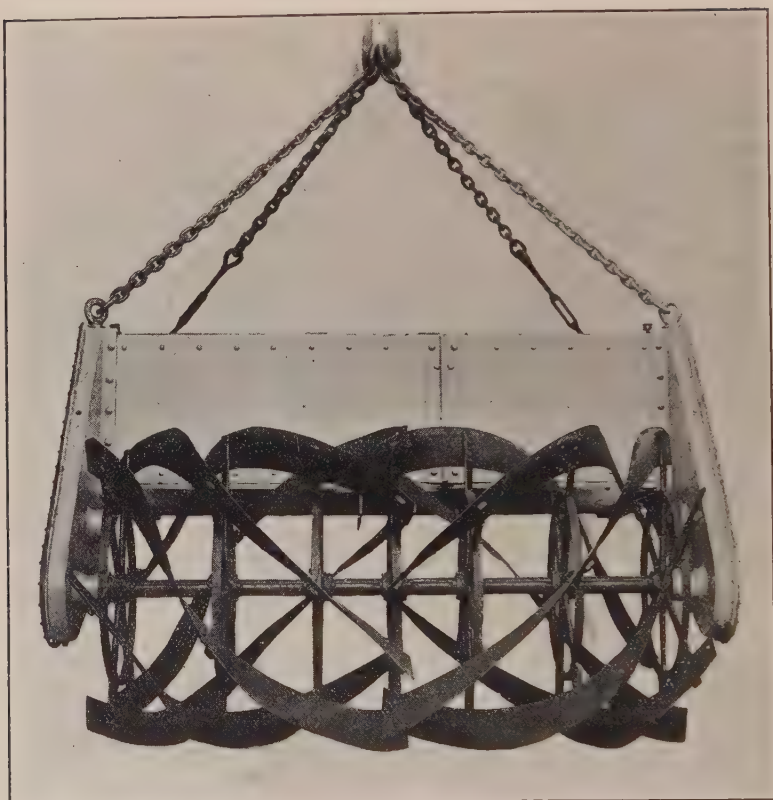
Front View of Crane Sand-Heap Cutting Machine.
